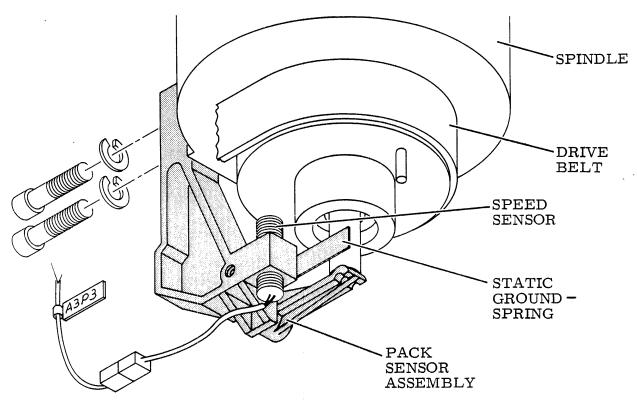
Pack Sensor Assembly Replacement (S/C 08 and Below)
